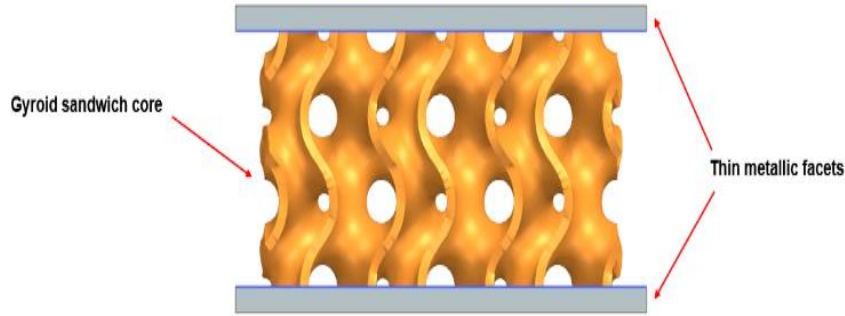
Gyroid sandwich panel used as a bridge bearing.
